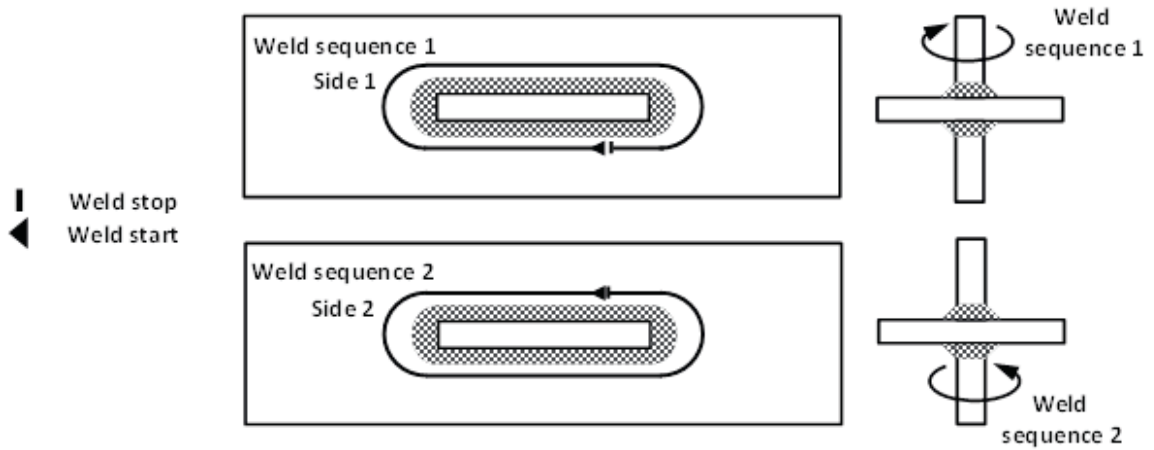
Welding start/stop location, direction and sequences for the joint
